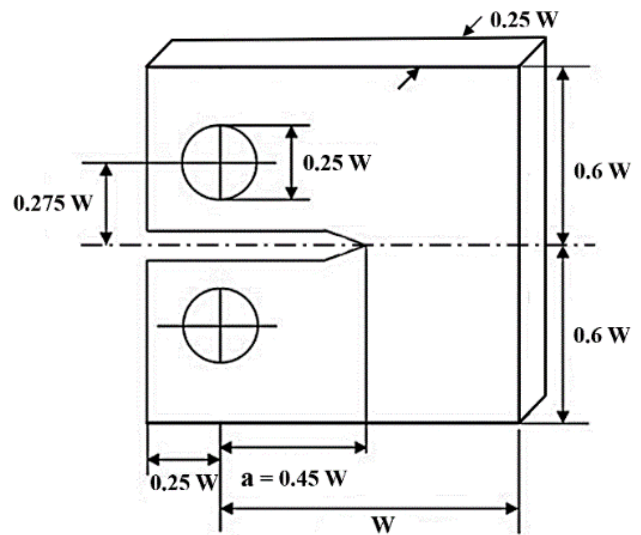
Dimensions of the CT specimen ($W=50.8$ mm) ASTM D5045 [21]
